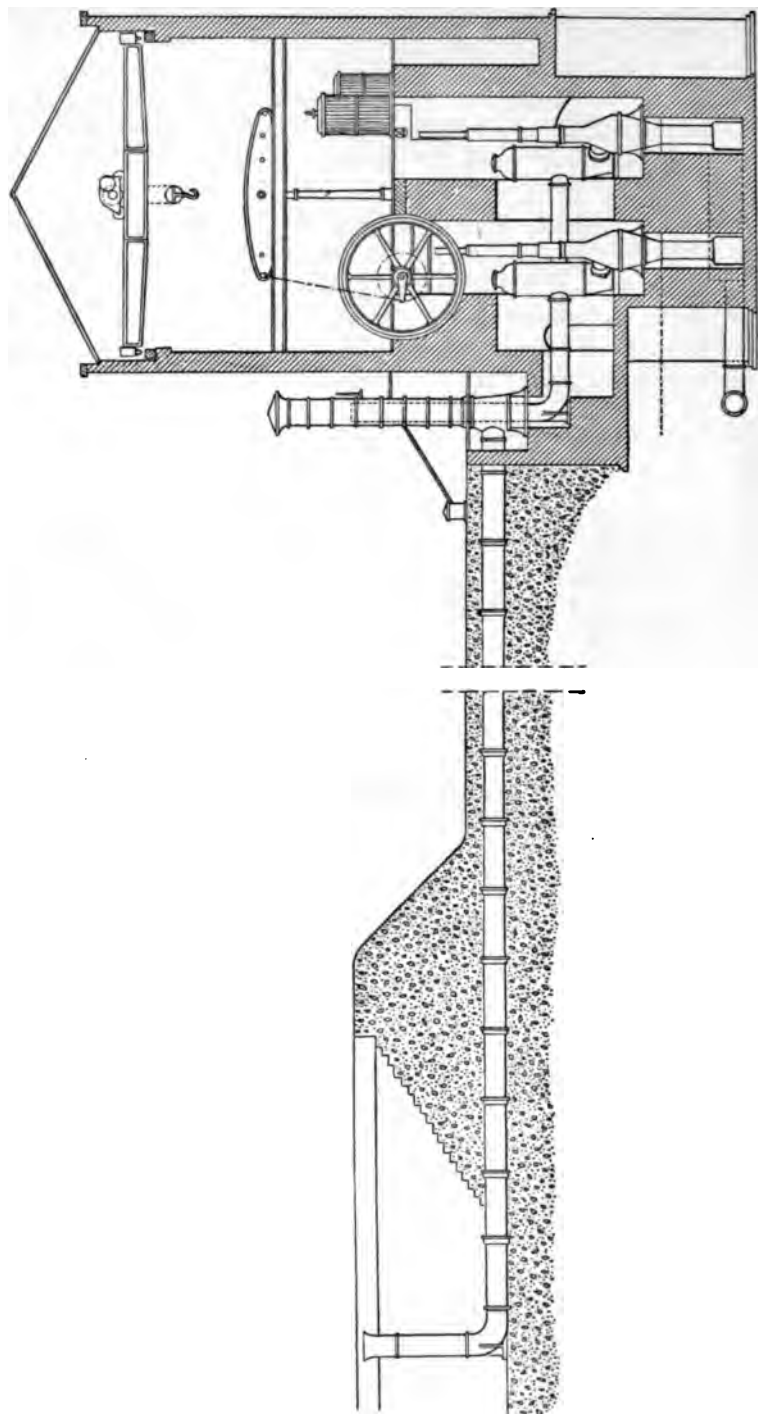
James Simpson & Co.: Compound Beam Pumping Steam Engine (J Engine), Lambeth Water-works, Thames Ditton.
